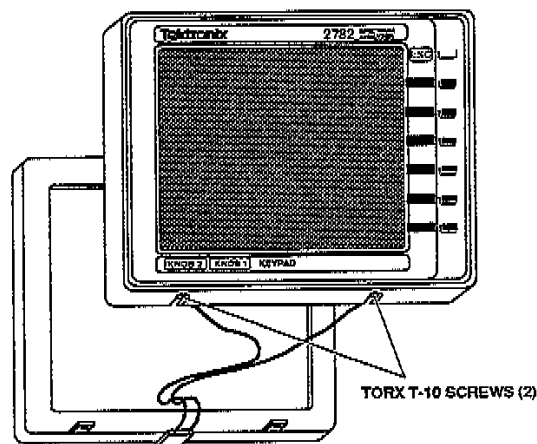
Removing the Color Shutter and CRT Bezel.
